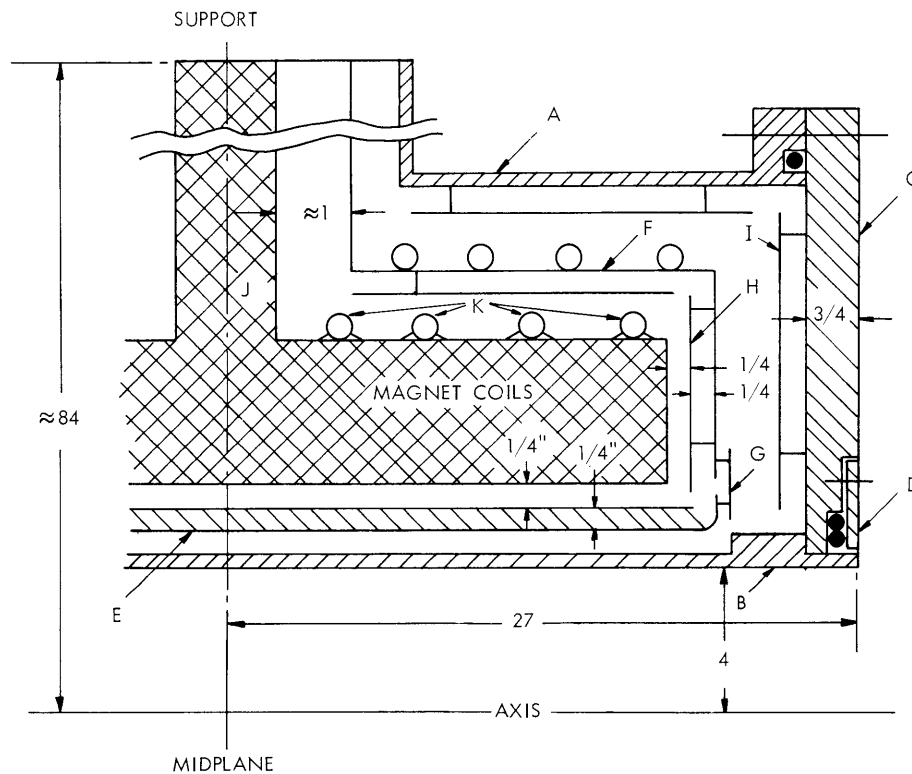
Sketch (not to scale) of cross section of magnet, upper right quadrant, showing critical dimensions, in inches.
